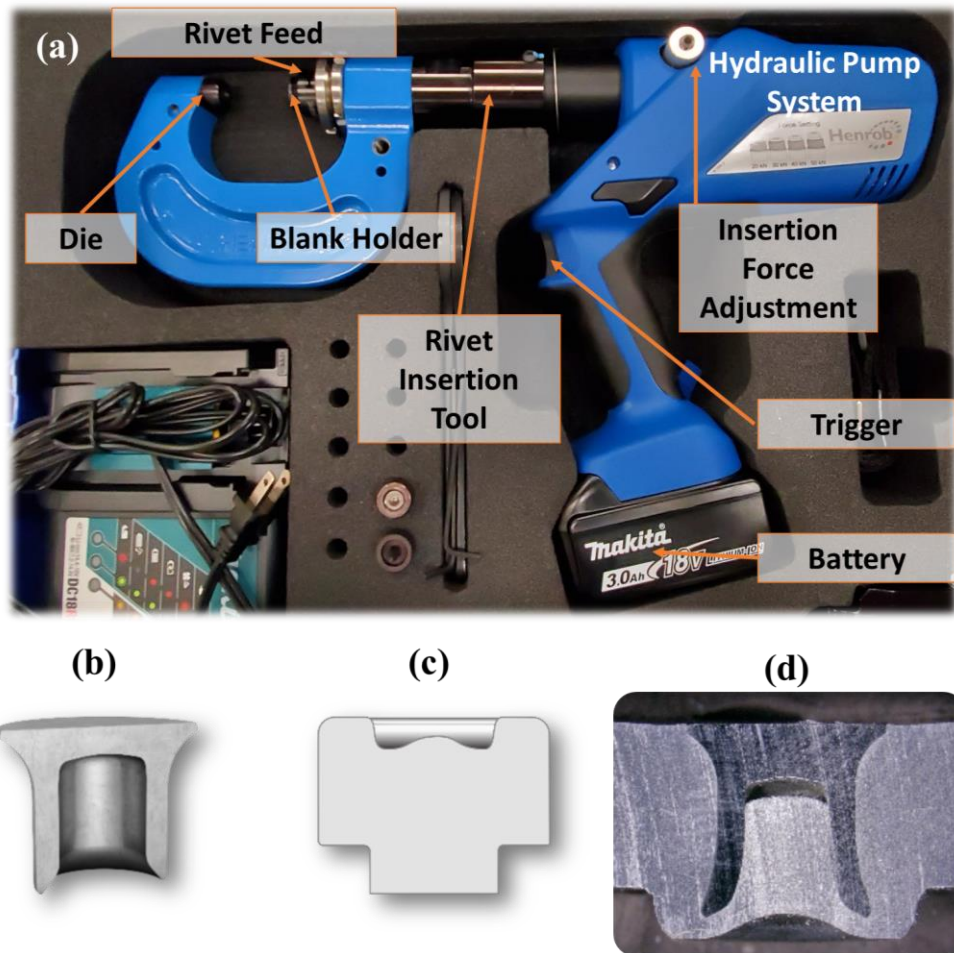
(a) Rivlite MK V Setting tool, (b) standard semi-tubular rivet, (c) a domed pip (DP) profile die and (d) SPR joint morphology showing a cross-section view of the formed joint.
